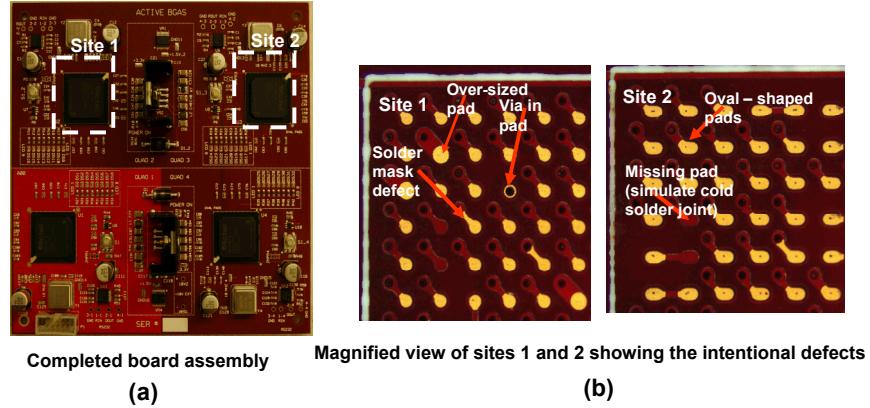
(a) Completed board assembly. (b) Magnified view of the board showing the intentional defects designed on the board that will create some commonly occurring solder defects.
